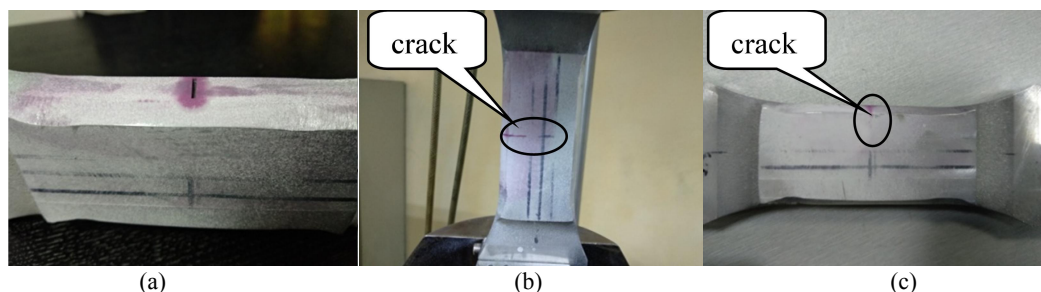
The penetration display of the cold spray repair test piece under three conditions: (a) penetration display before fatigue test; (b) crack penetration display under load; (c) crack penetration display
